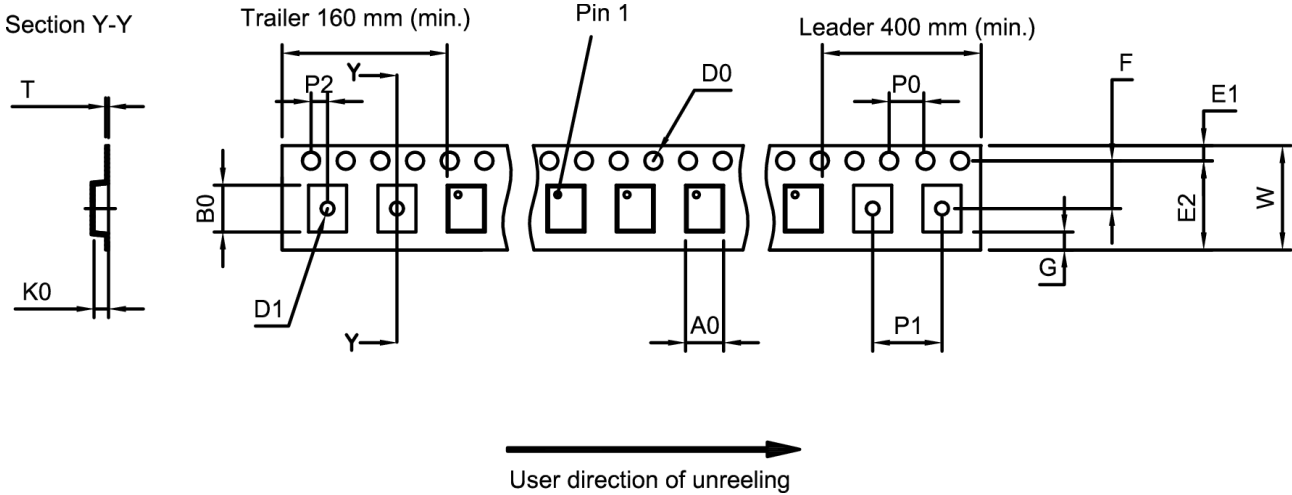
Drawing of tape (first-angle projection) with tape dimensions according to Table 1.
